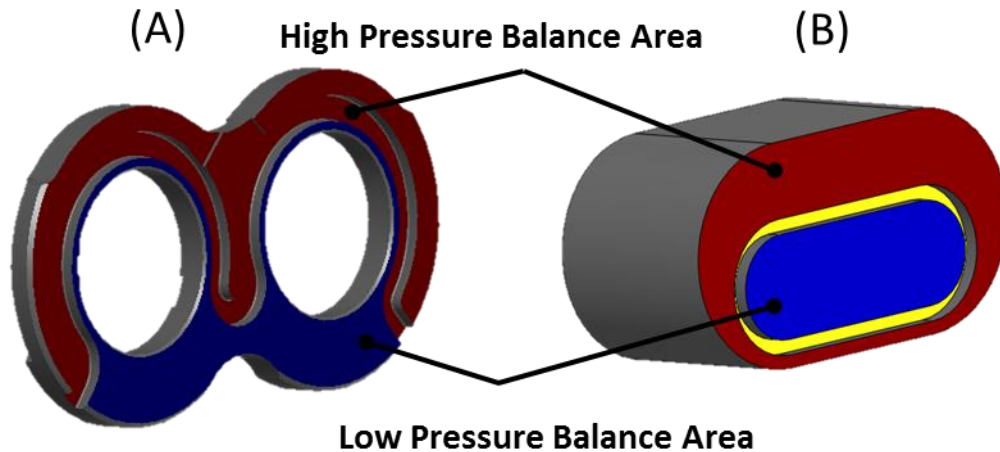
Figure showing the different kinds of lateral bushing designs (A) Pressure plate type design (B) Bearing block design (journal bearing through the gear shaft not shown here).
